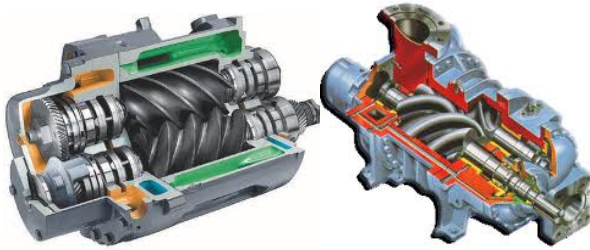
Types of twin-screw compressors (left equipped with oil gear pump and right gearless)
